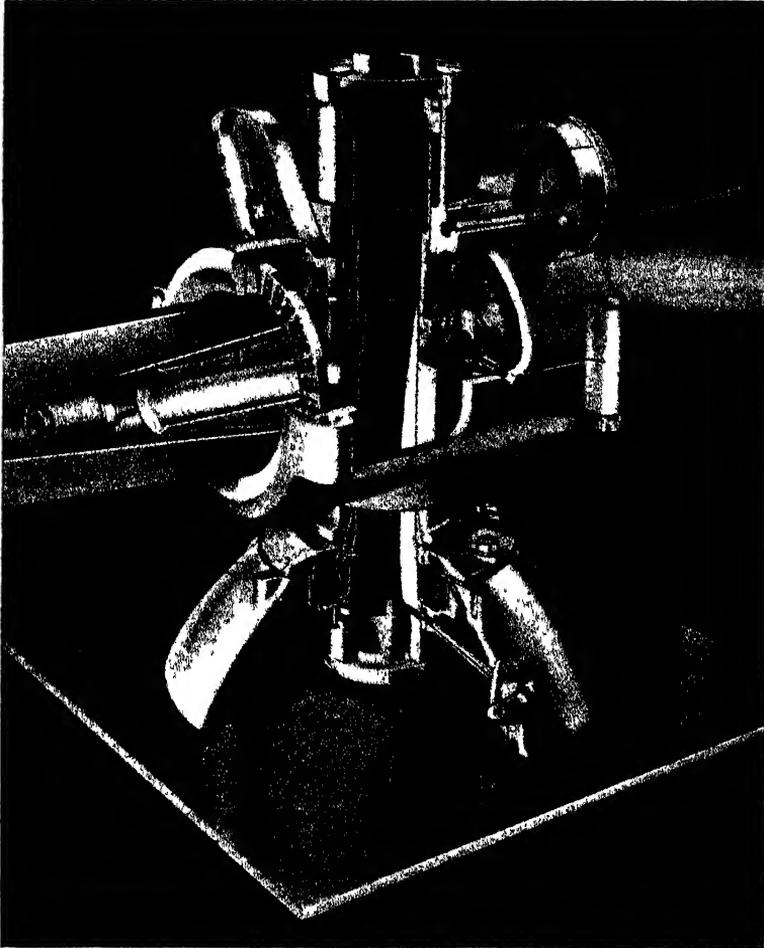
De Havilland Hub and Operating Mechanism (High-pitch Setting)
